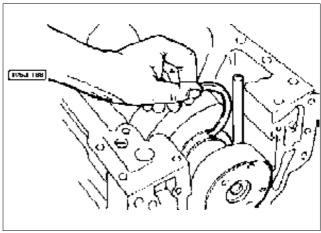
Fit the two crankshaft half shoulder rings into the rear block support;
